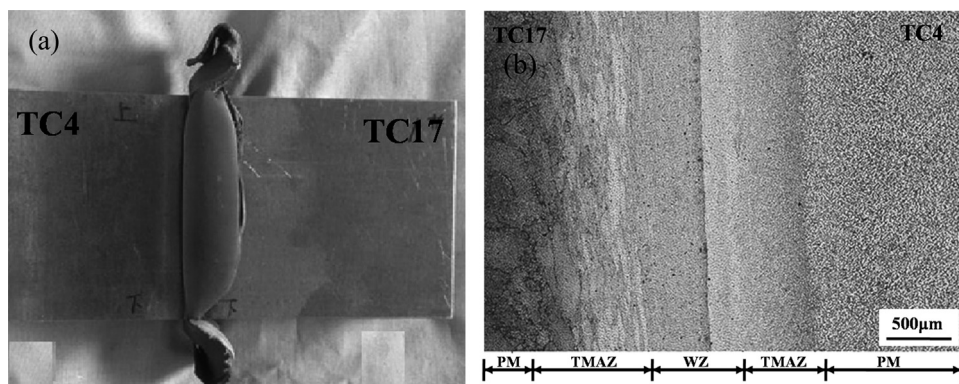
Linear friction welded joint: (a) linear friction welded joint and (b) microstructure (585 °C, 3 h).
